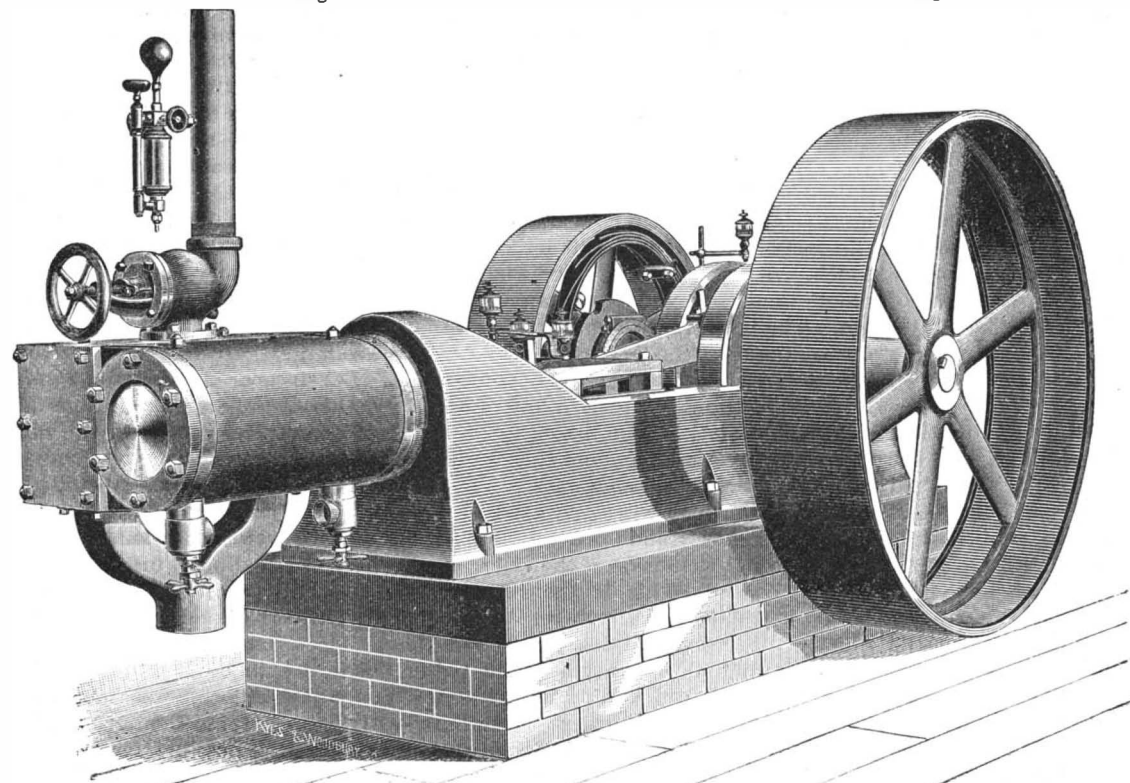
IMPROVED AUTOMATIC CUT OFF ENGINE.
